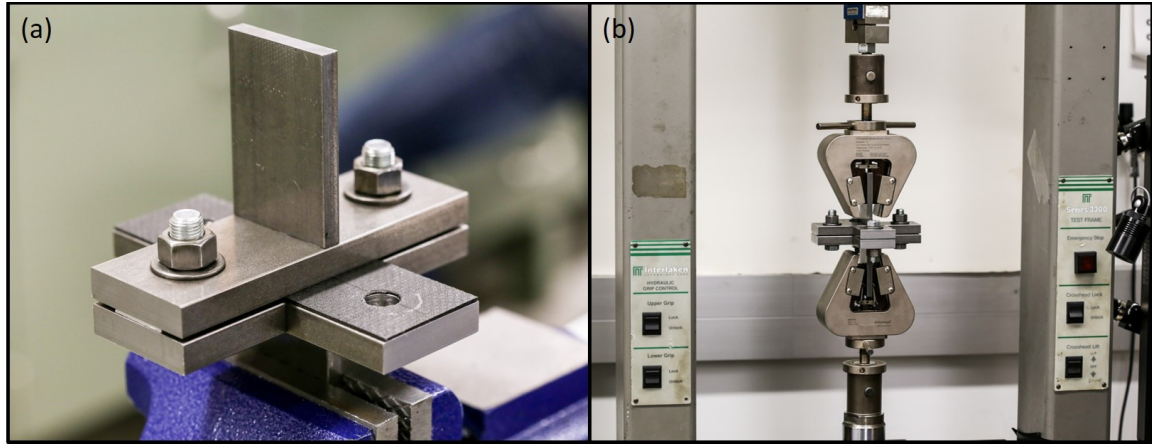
(a) Mounting a cross tensile specimen into the cross tensile loading fixture. (b) Cross tensile testing setup, with Interlocken load frame, MTS grips, and in-house built loading fixture.
